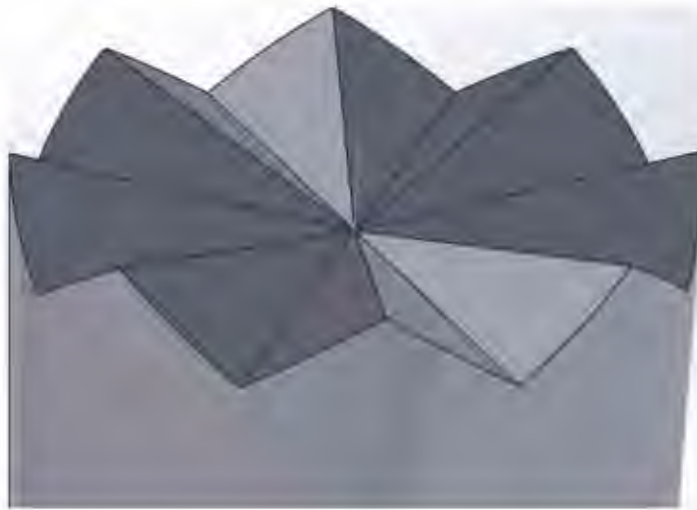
Rubber face produced using straight cuts
